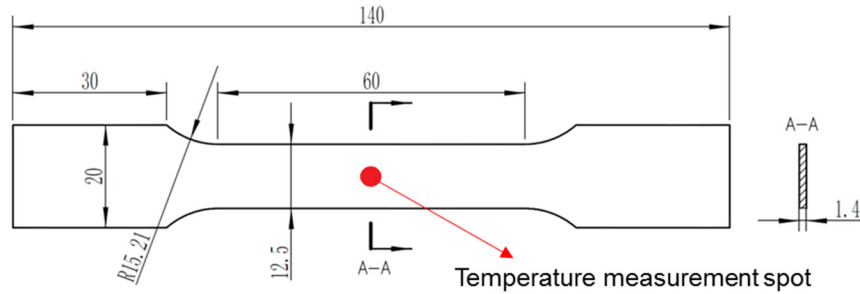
Dimensions of the tensile test specimen (unit: mm)
